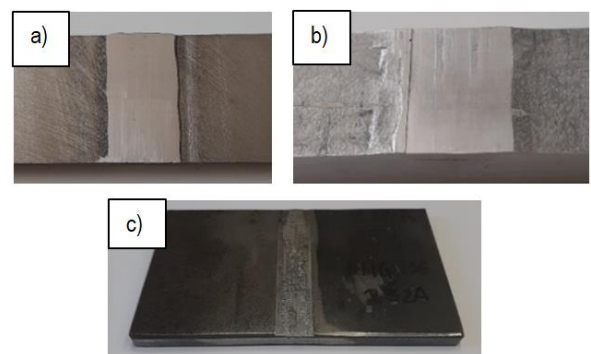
Weld bead after the finishing [18, 19]: a) stainless steel 1.3964; b) aluminium alloy PA47(7020); c) unalloyed steel S235JR
